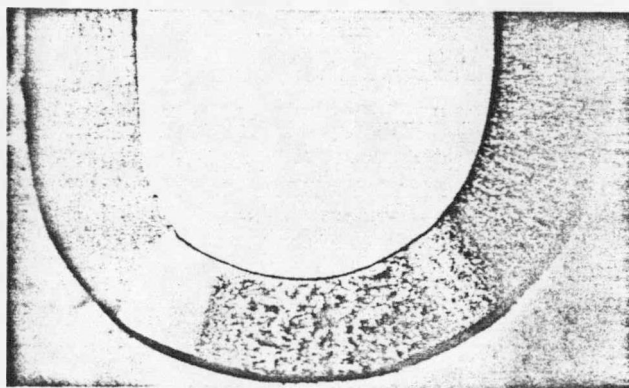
CONSTRAINED U-BEND TUBE/TUBESHEET WELD TESTED IN 20% NaOH AT 232°C (450°F) SHOWING CRACKING IN WELD METAL (SPECIMEN No. 1079A)
